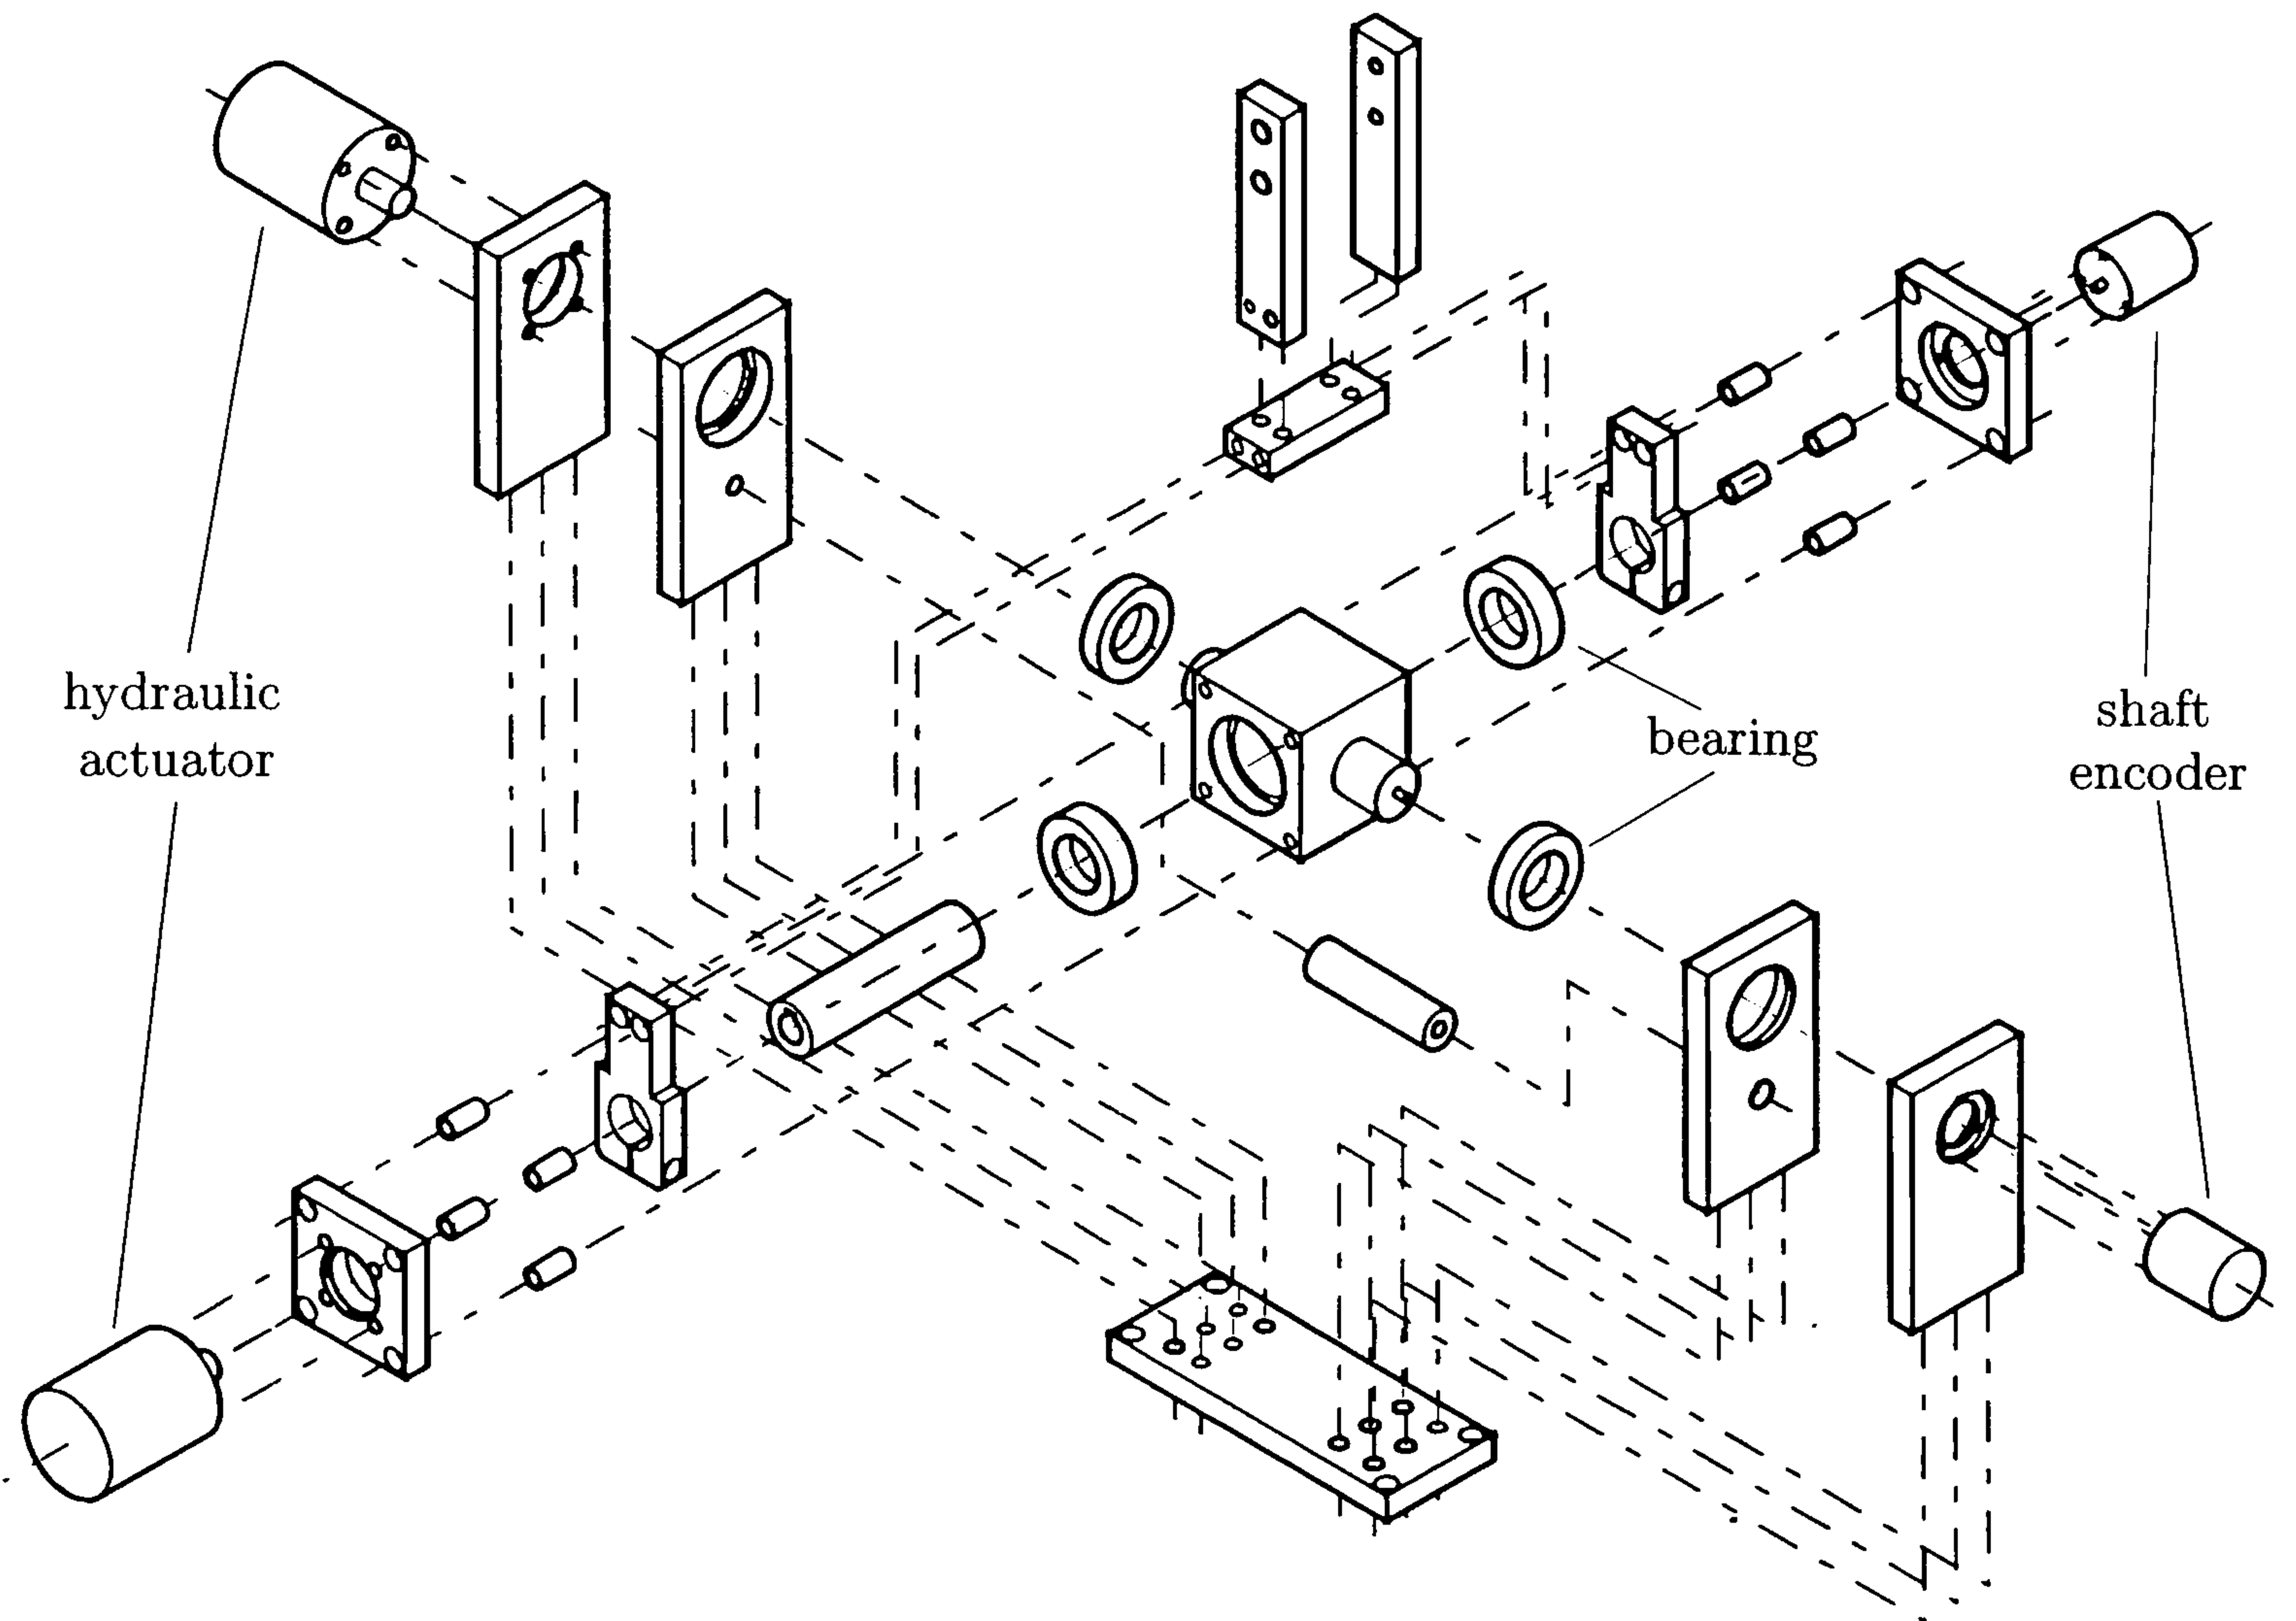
Exploded view of the actively controlled two degree-of-freedom joint.
